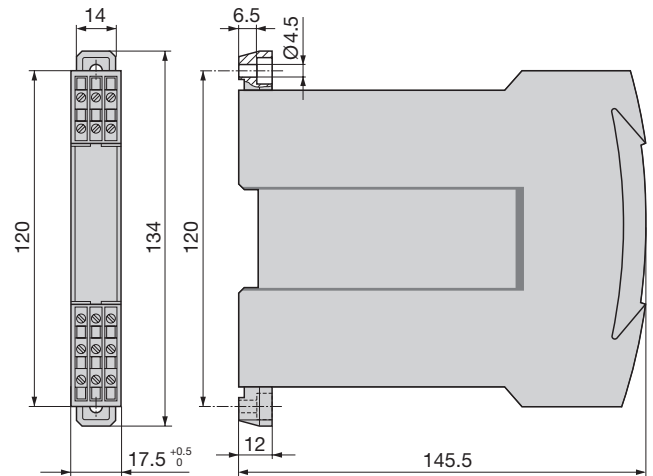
SINEAX C 402-1 in housing S17, screw hole mounting brackets pulled out.
